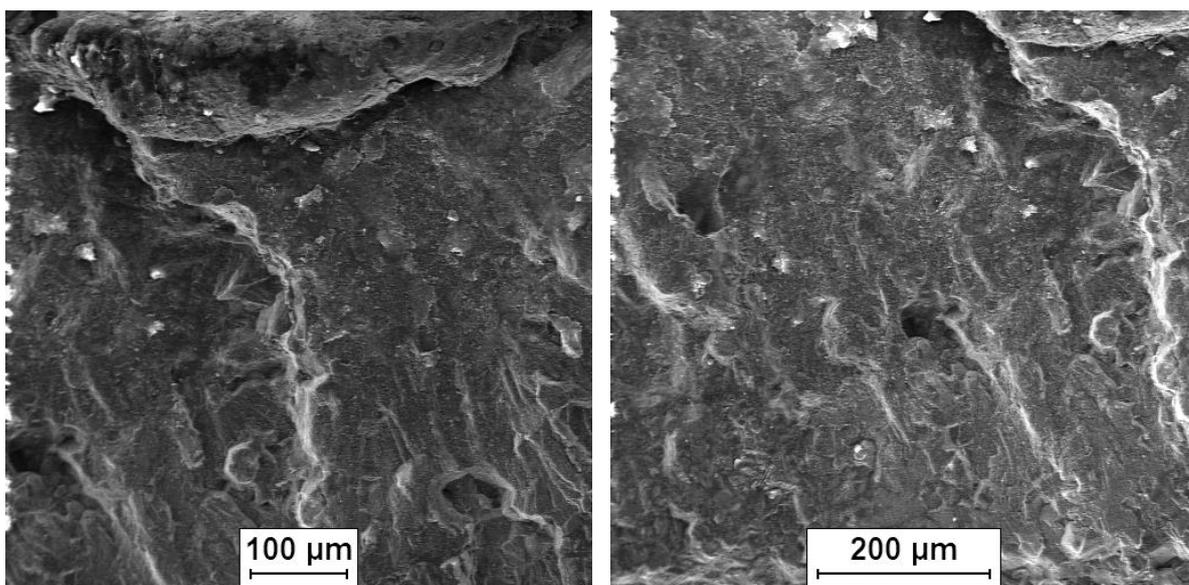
Fatigue crack from the lower area marked in fig. 20. Visible light fatigue striations [source: Silesian University of Technology]
